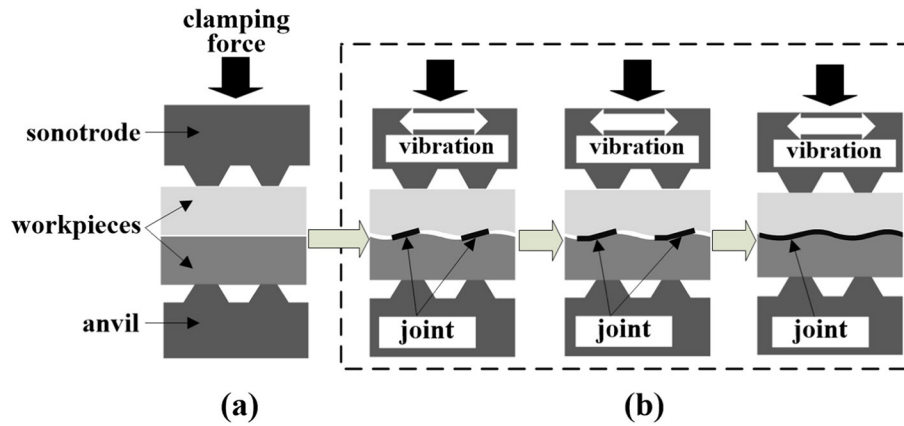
An illustration of USW process: (a) clamping step and (b) welding step.
